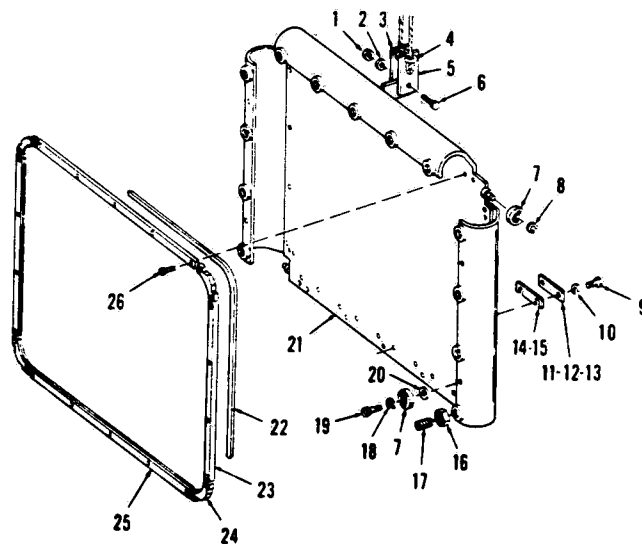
DOOR PACKAGE (Part 3 of 3).
